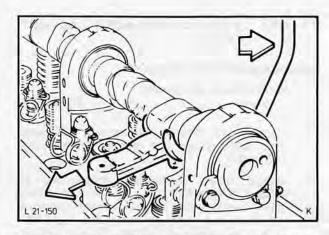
Remove cam follower with Special Tool 21–005–A, 'B' engine
